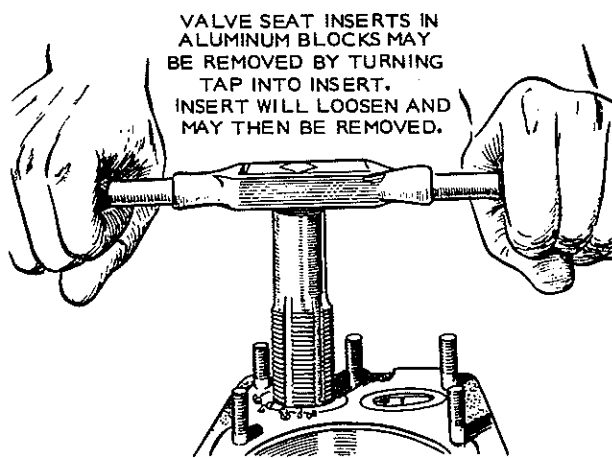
REMOVING VALVE SEAT FROM ALUMINUM BLOCKS
